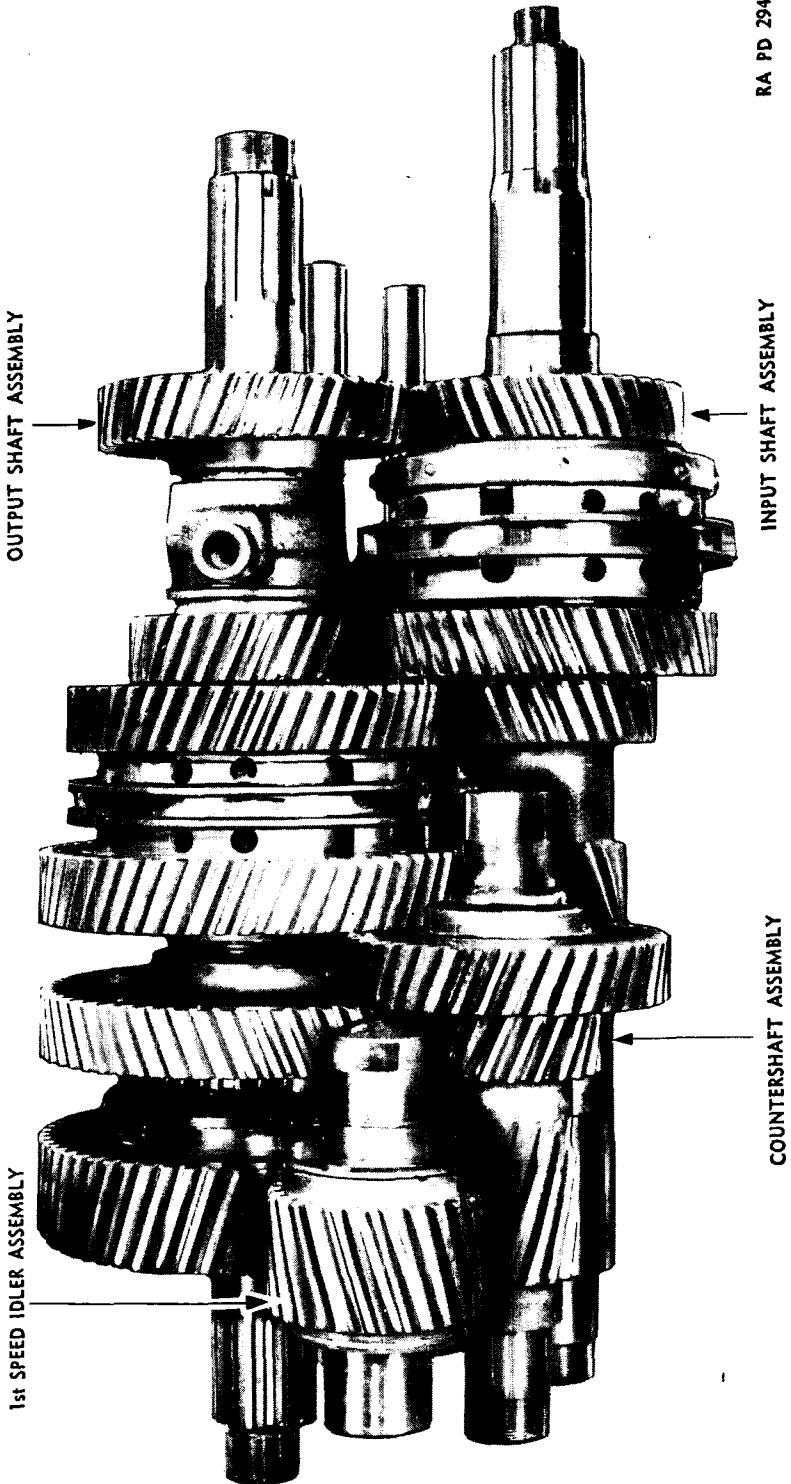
TRANSMISSION GEAR ASSEMBLIES
